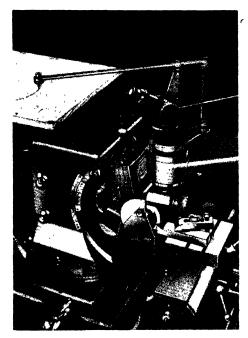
Grinding a form tool, using a Wickman optical profile grinder
